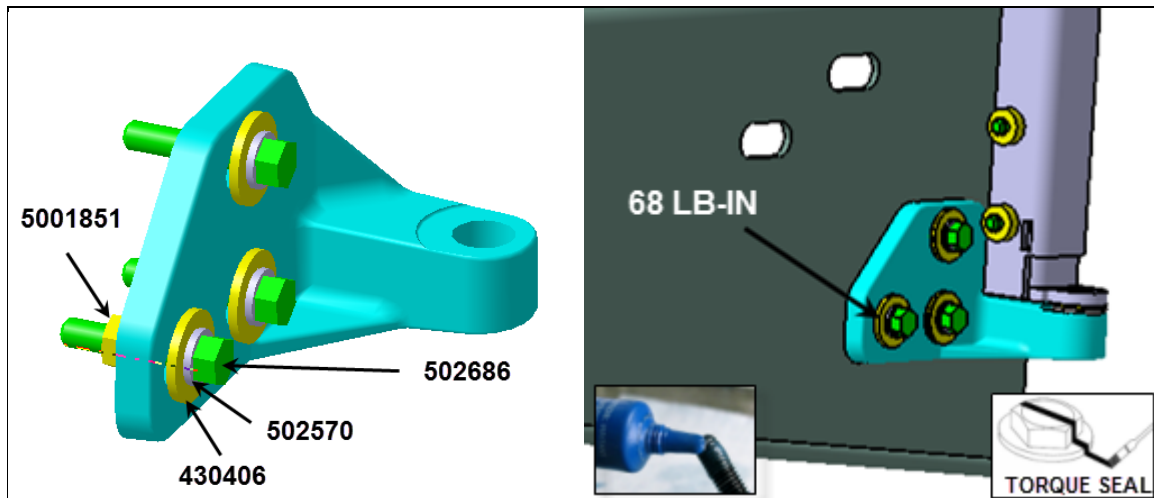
LOWER HINGE BOLT INSTALLATION & TIGHTENING TORQUE
